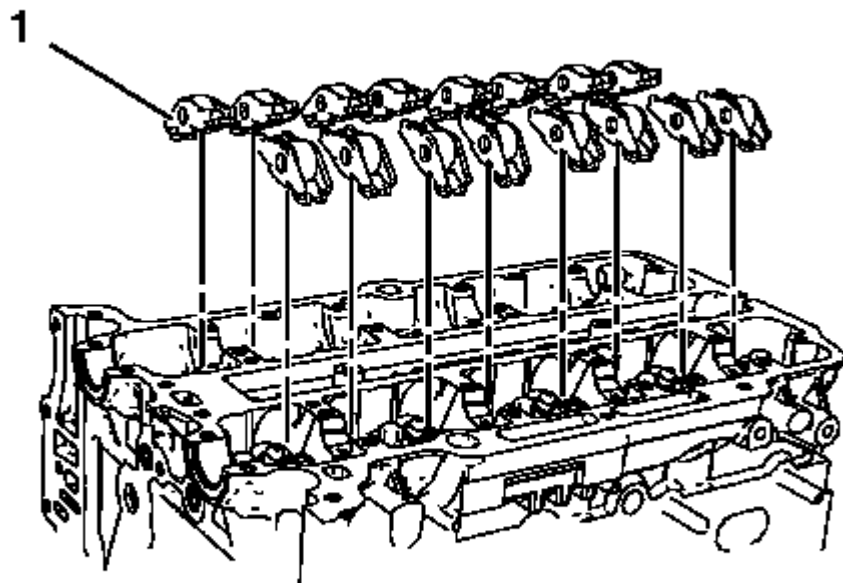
Hydraulic Valve Lash Adjuster Arms
